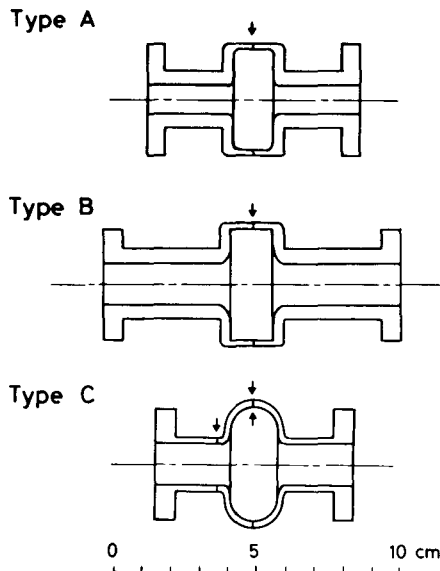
Various geometry of C-band cavities, arrows indicate the welding points.
